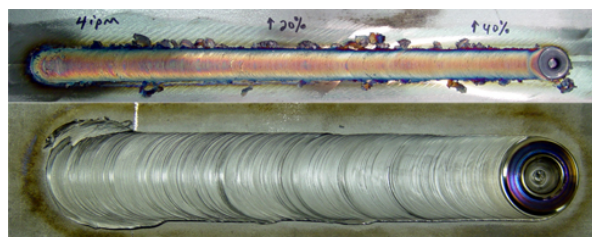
Sample welds made with ORNL tool material. Above: stainless steel 304, below: Ti-6Al-4V. Plate thickness: 0.25 in. (6.35 mm).
